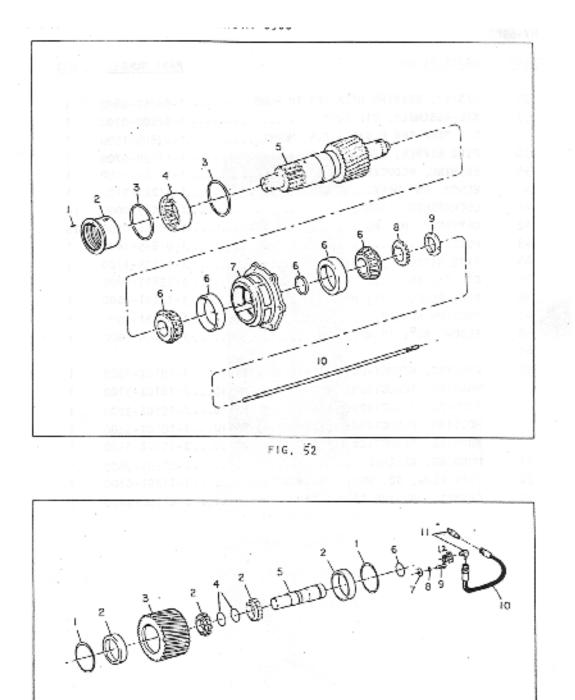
IDLER GEAR AND RELATED PARTS HY-6900
